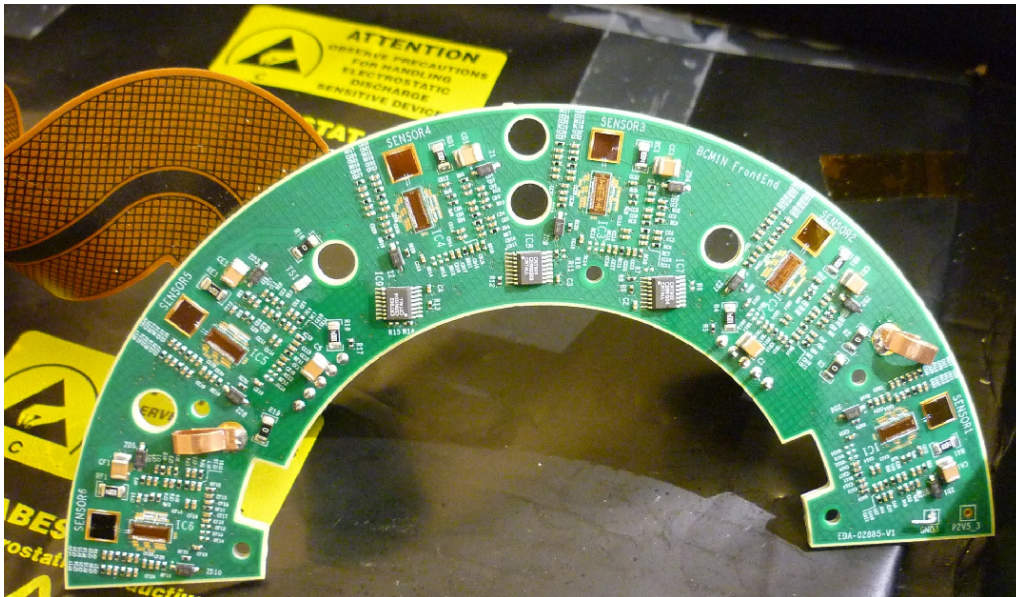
The C-shape assembled with 6 diamond sensors and front-end ASICs.
